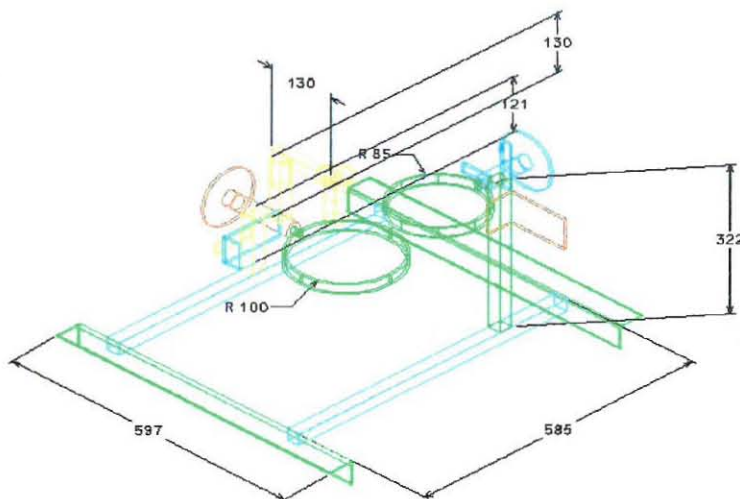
The Mixing Frame with Beaker Holders.
